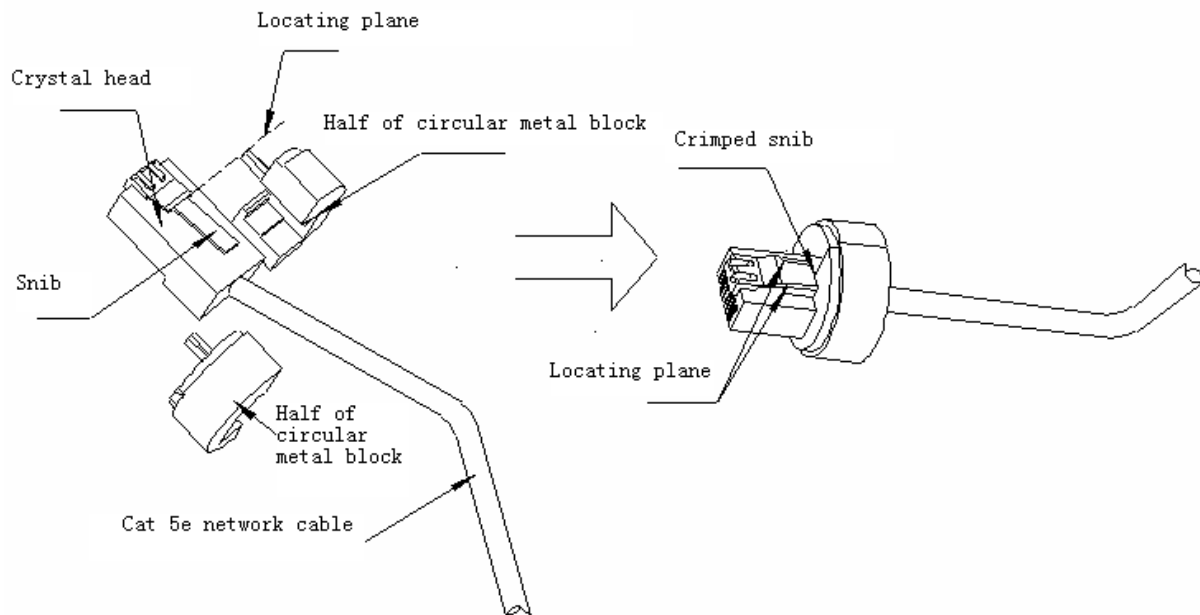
Assembly diagram for part 3, part 4 and crystal head
